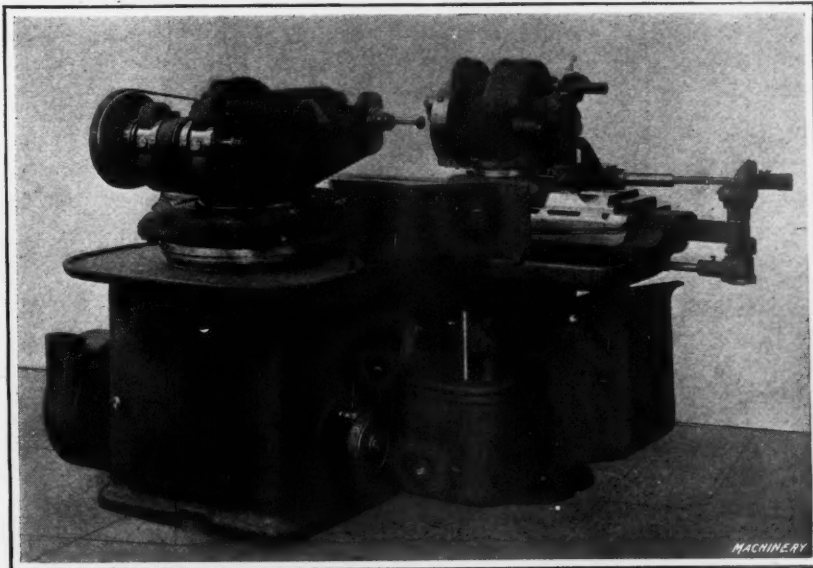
Rear View of Norton Universal Grinding Machine showing Internal Grinding Spindle in Working Position, and the Regular Wheel-spindle at the Rear
